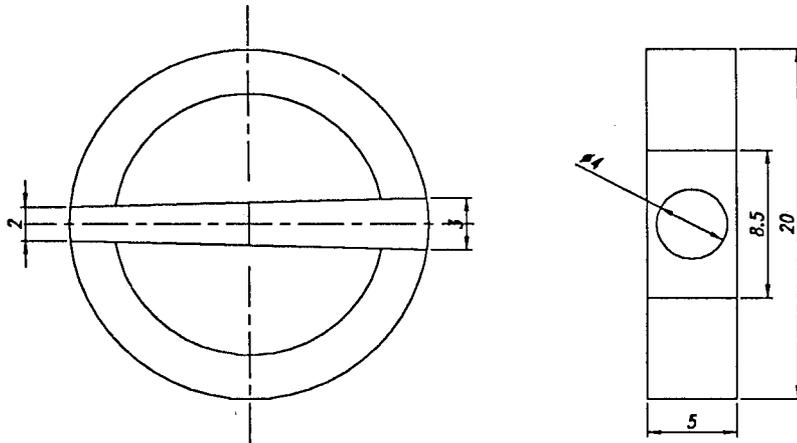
TABLE SCREW ROD LOCKING COLLAR
